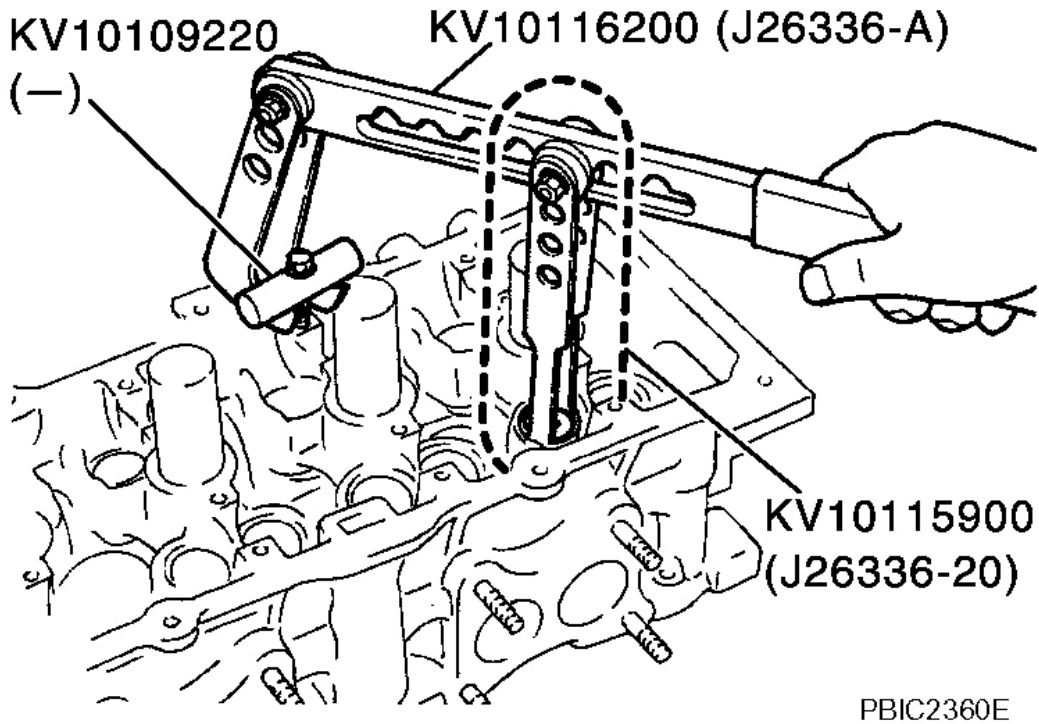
Compressing Valve Spring With Valve Spring Compressor
